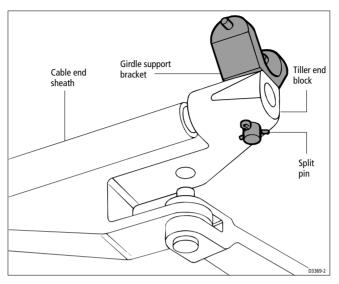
Fitting girdle support bracket (Mercruiser 93/OMC/Yamaha)
